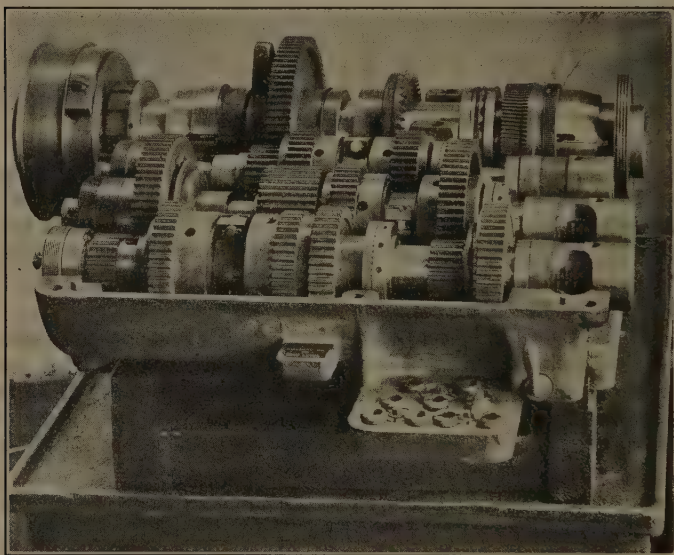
HEADSTOCK OF 3-IN. FLAT TURRET LATHE
